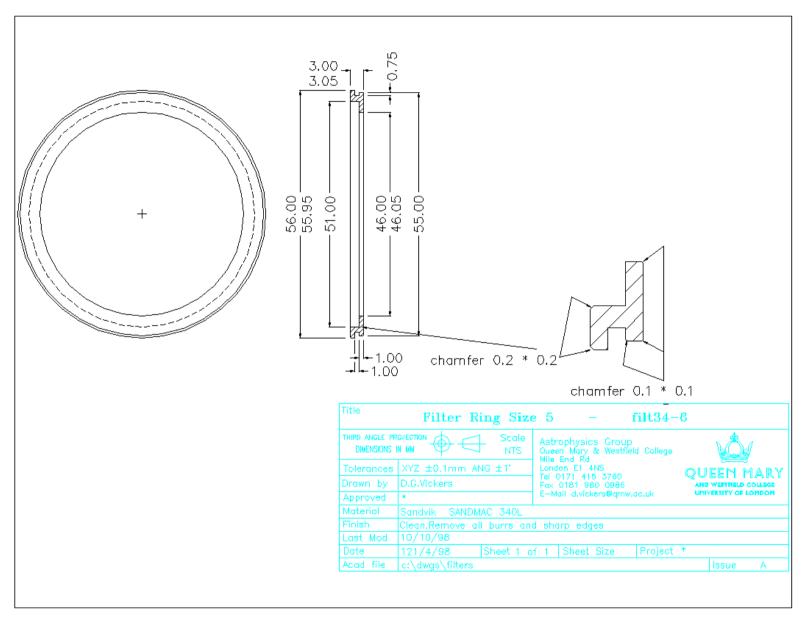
Size 5 filter ring component drawing (two per assembly)
